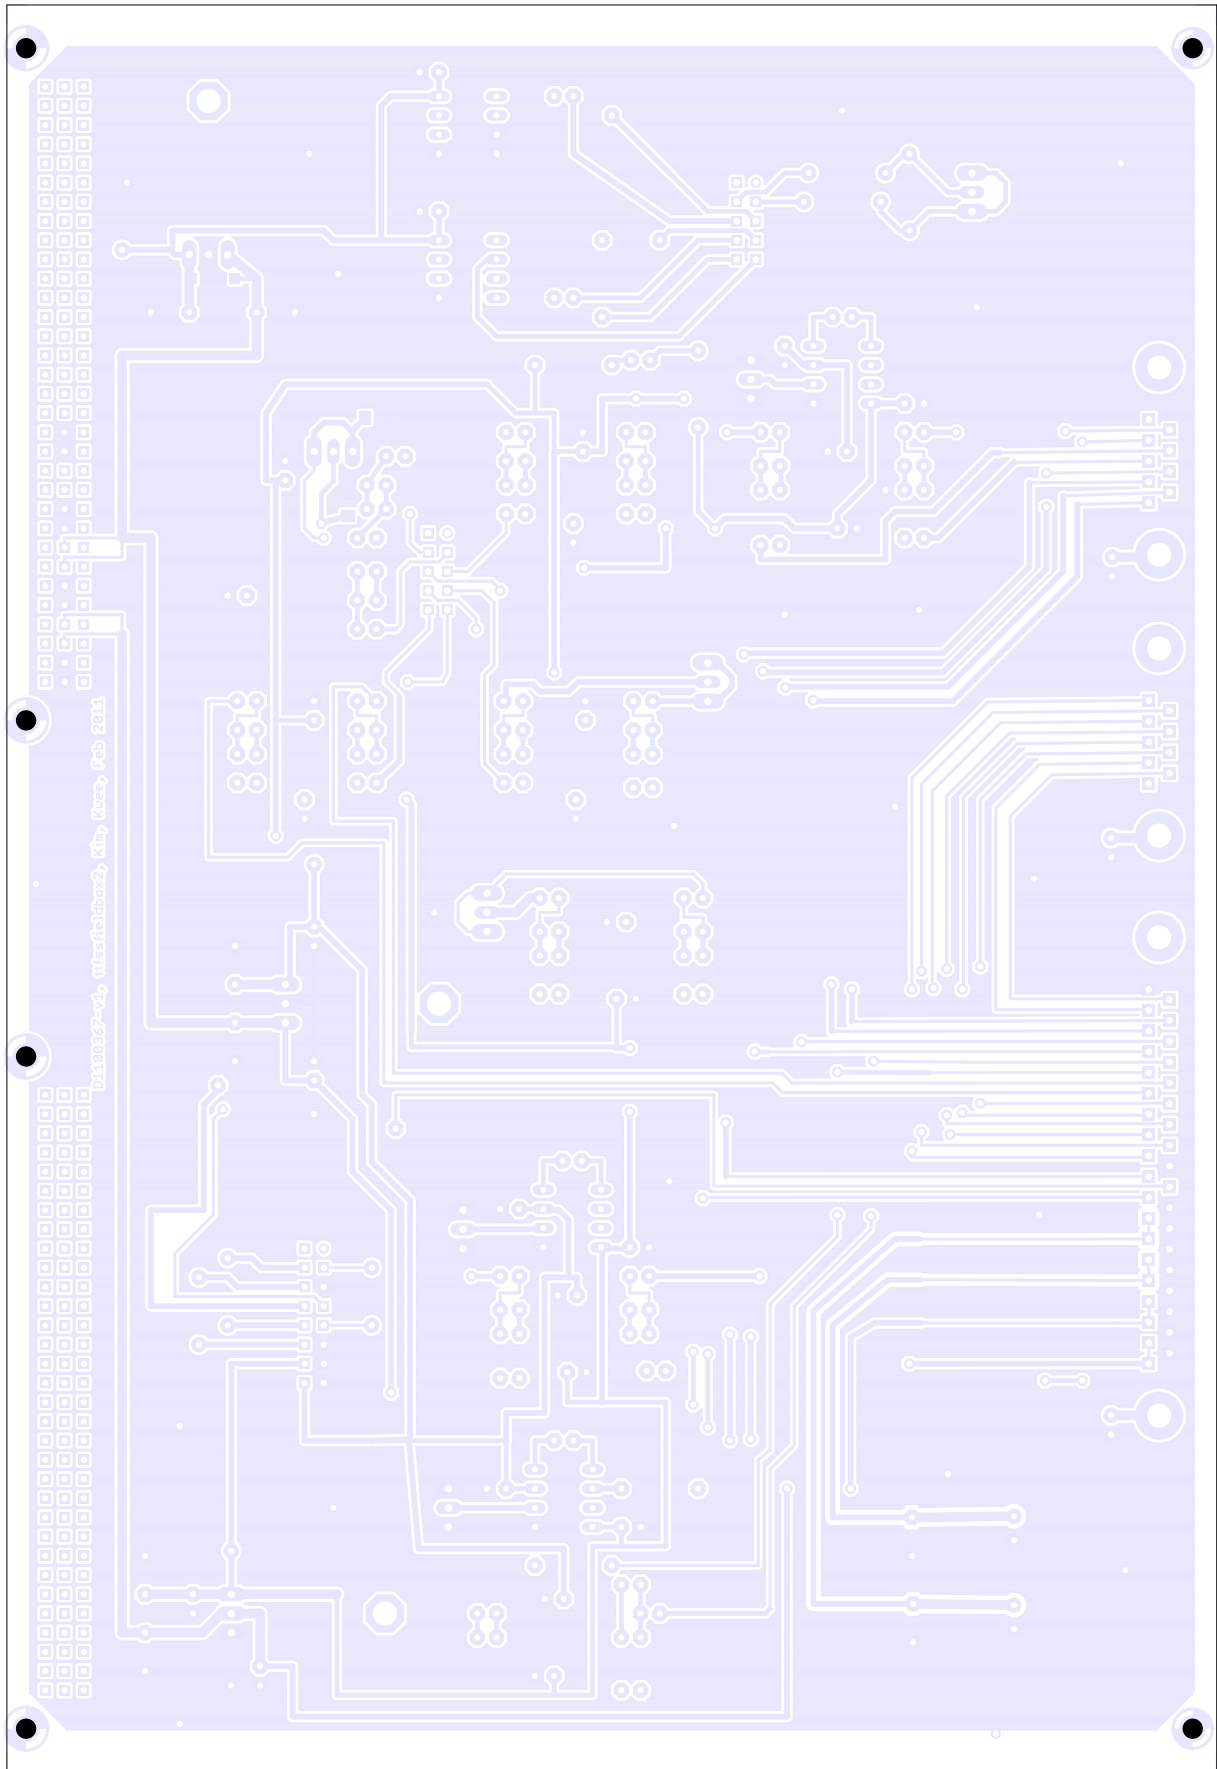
Board bottom view showing drills with 2.7 mm (0.106 in) diameter
